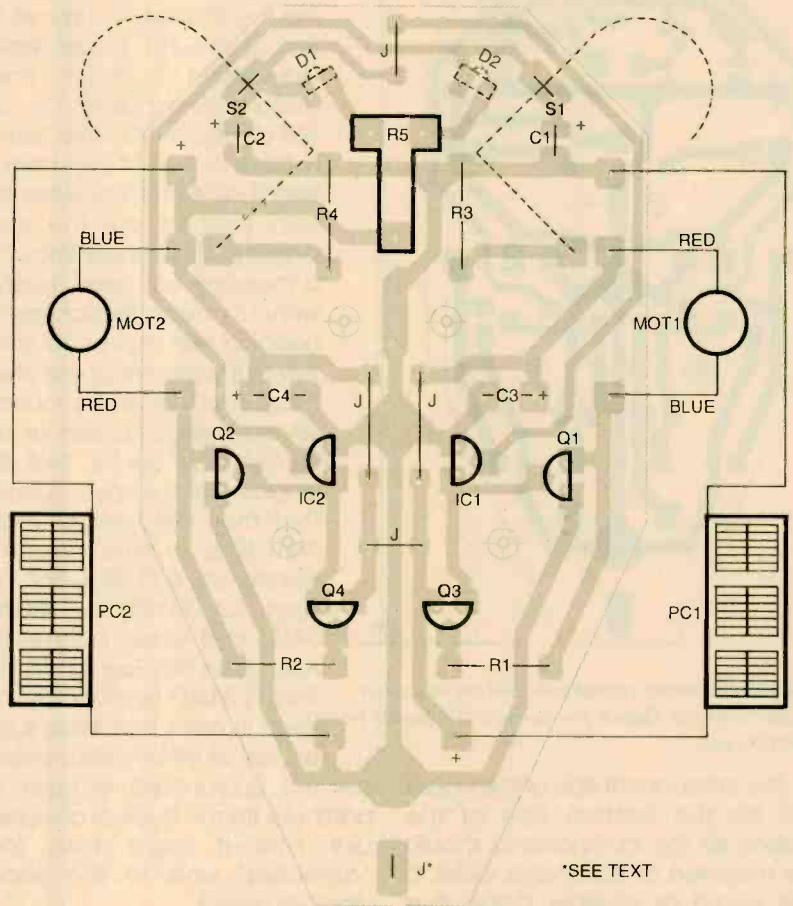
Here is the parts-placement diagram for the Solbot solar-powered robot bug. All of the parts that are placed on the component side will be the unit's "underbelly." The jumper wire at the narrow end is a "skid" that holds up the robot's rear end.
